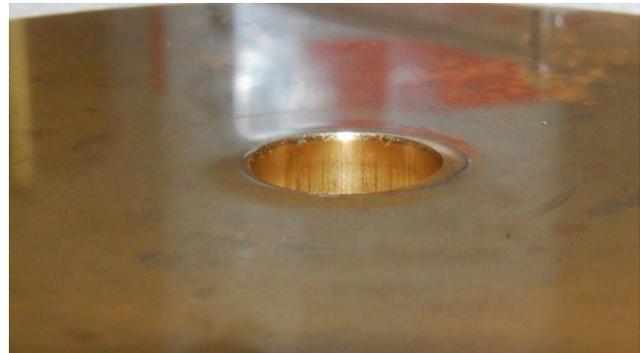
A great deal of force is required to push the ball through the hole and a burr will be raised on both sides of the flange. The burr is easily removed by facing each side of the flange followed by progressively finer grits of paper until a 600-grit finish is achieved.
